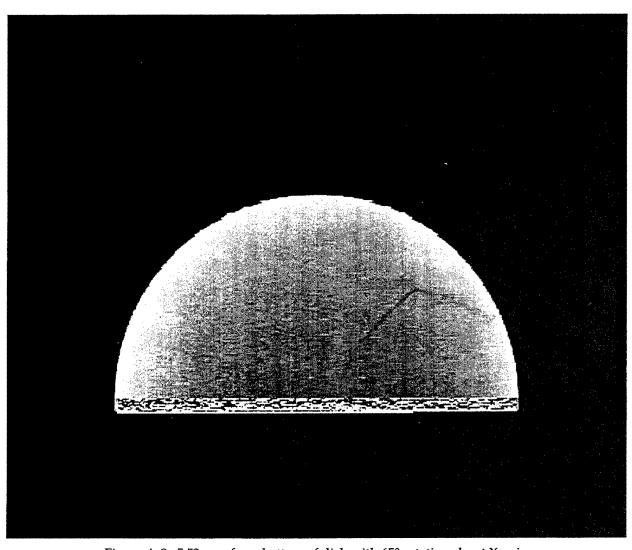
5.53 mm from bottom of disk with 65° rotation about X-axis.
